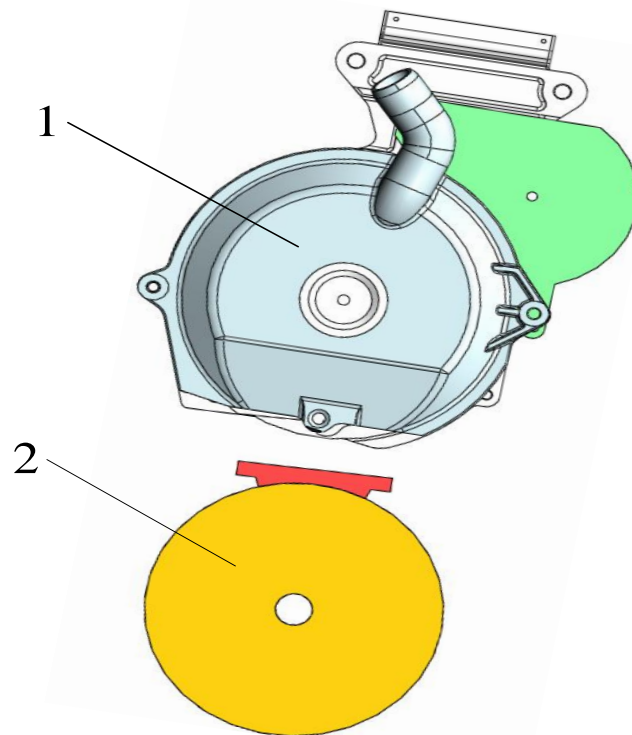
Combined seed metering device. 1. Pneumatic seeding mechanism; 2. Honeycomb seeding mechanism.
